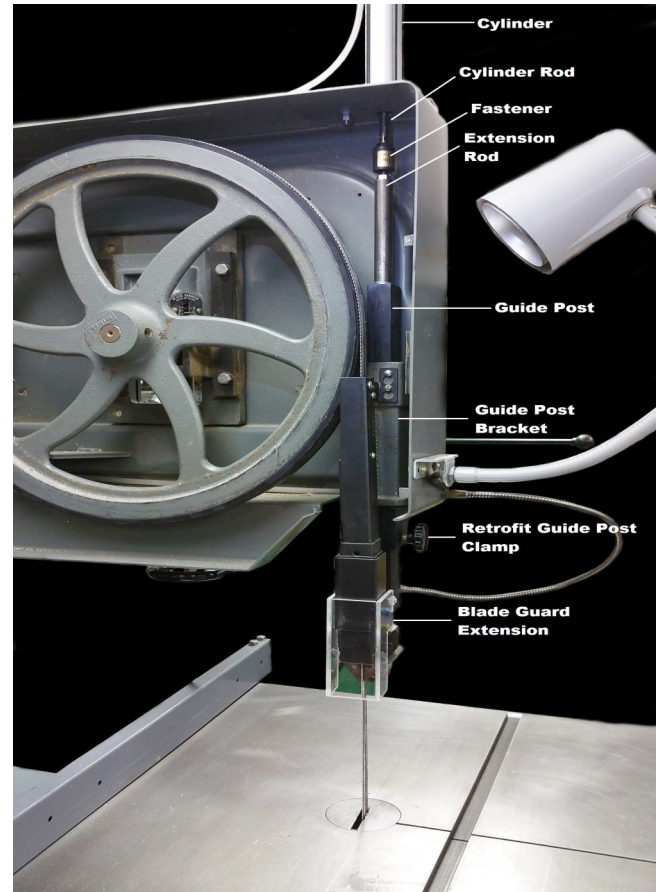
The Linkage: Cylinder, Cylinder Rod, Fastener, Extension Rod, Guide Post, Guide Post Bracket, and Retrofit Clamp
